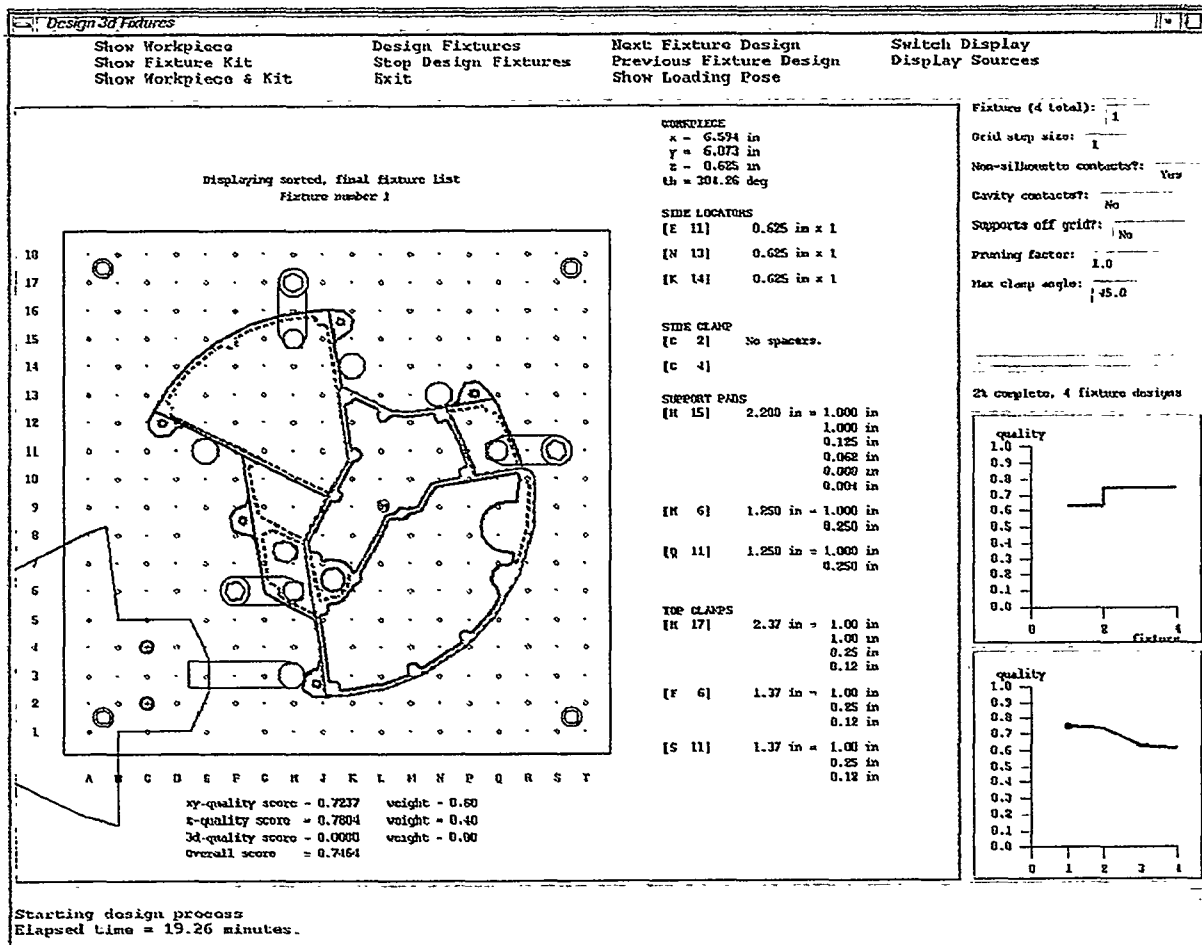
Fixture-design for fixturing the cast housing and assembling the electrical components, shown with the design tool user interface.
